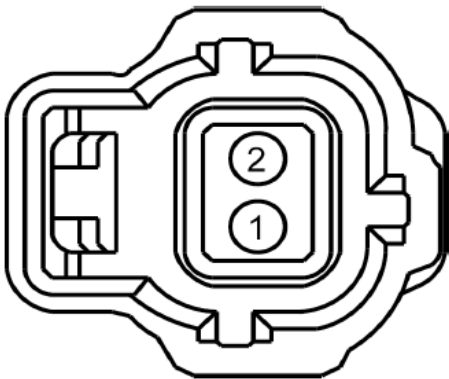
Intake Manifold Runner Control Connector End View (C1163)
